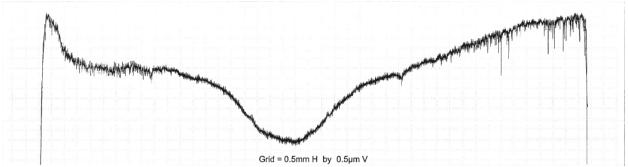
Exhaust Camshaft Fuel Pump Lobe #9, Nose B
